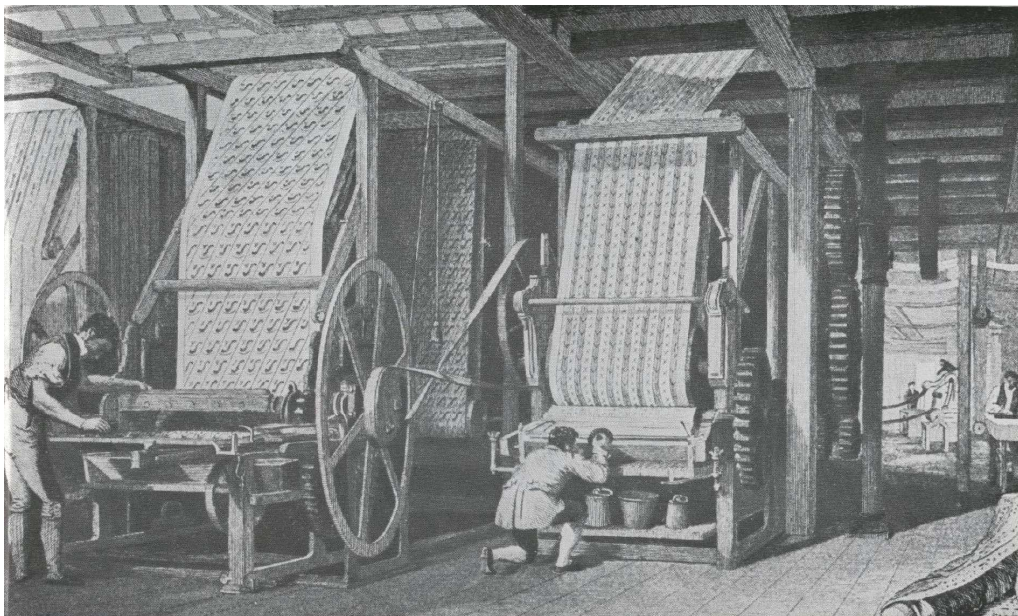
The mechanised calico-printing process in a cotton mill during the 1830s, showing on the left a machine with engraved copper rollers transferring the pattern onto the cloth, and on the right is a block printer using a hand-carved wooden block. (drawn by T Allom and engraved by J Carter, and taken from Chaloner and Musson 1965)
